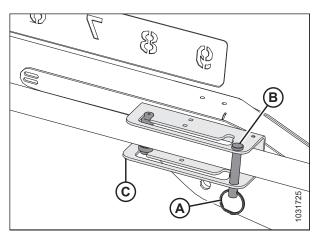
Outer Left Arm Cylinder – Forward Position
